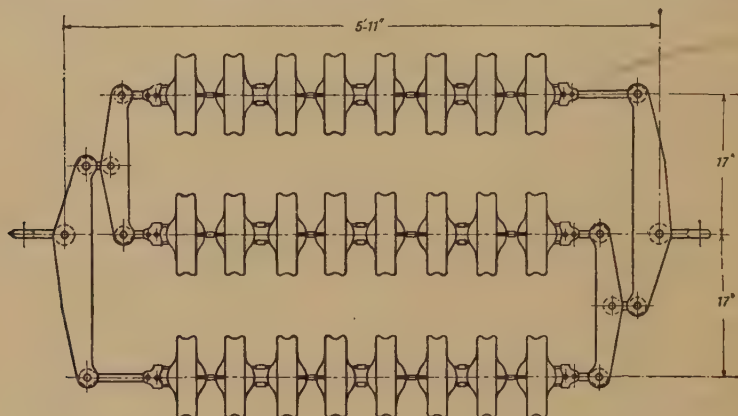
Equalizing insulator yoke for heavy strain positions.
